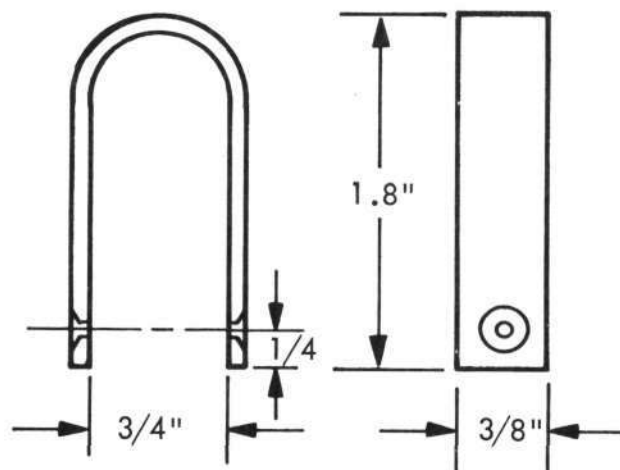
Typical "U" Bend Corrosion Test Specimen
